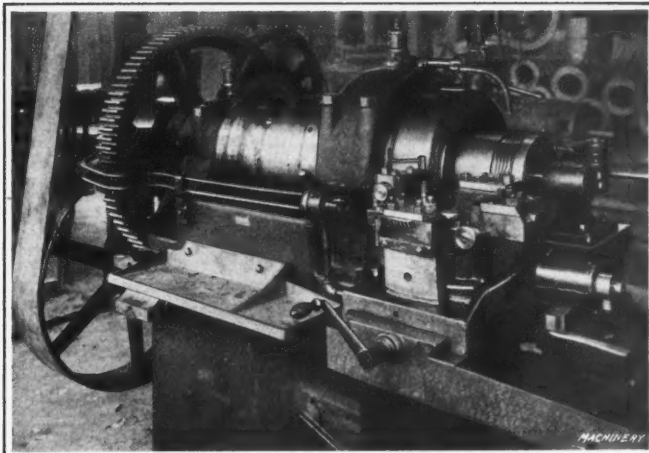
Machine for turning, under-cutting and waving Band Seat, and facing Shell to Required Length
